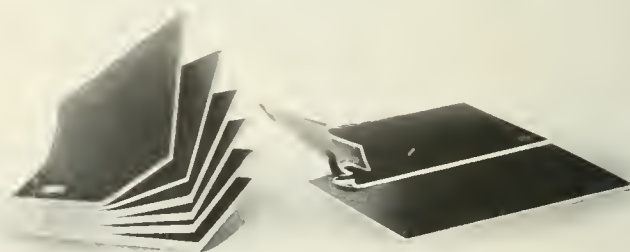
Six Sheets joined by a Spot Weld—Test of Spot Weld
